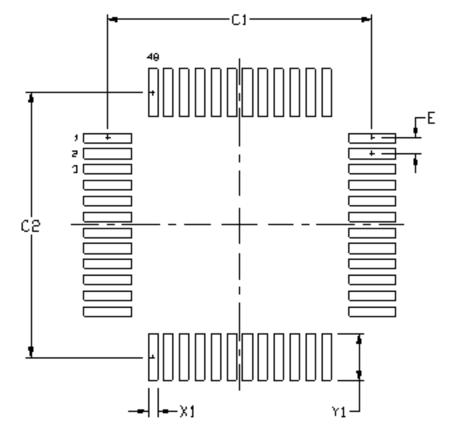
TQFP48 PCB Land Pattern Drawing
